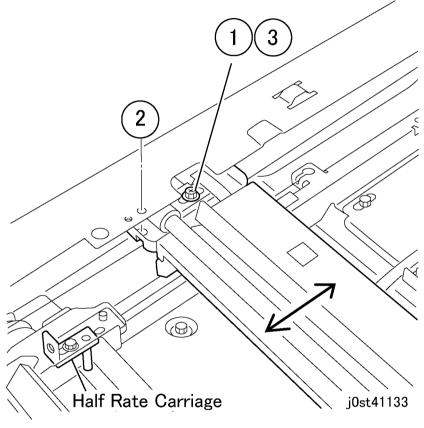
Position Adjustment of Full Rate Carriage 2/2 (j0st41133)
